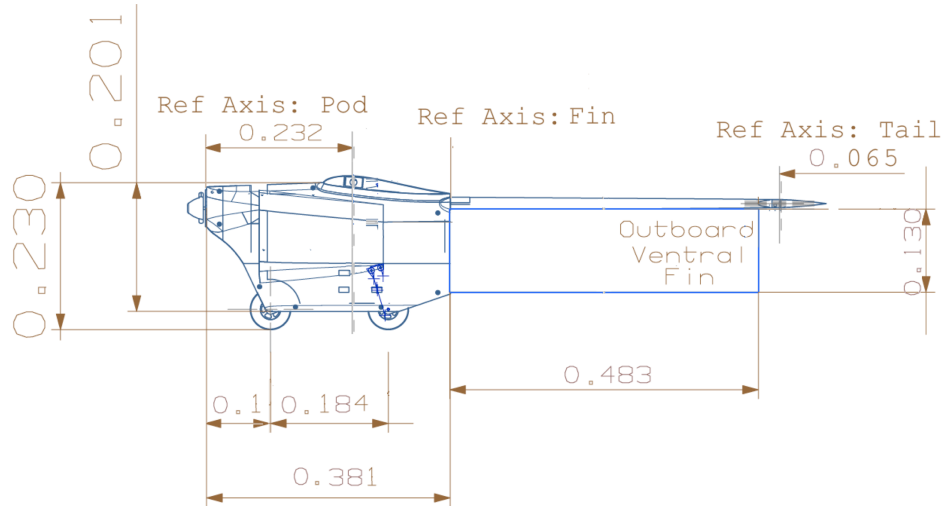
X-HALE outboard pod dimensional drawing (units: meter)
